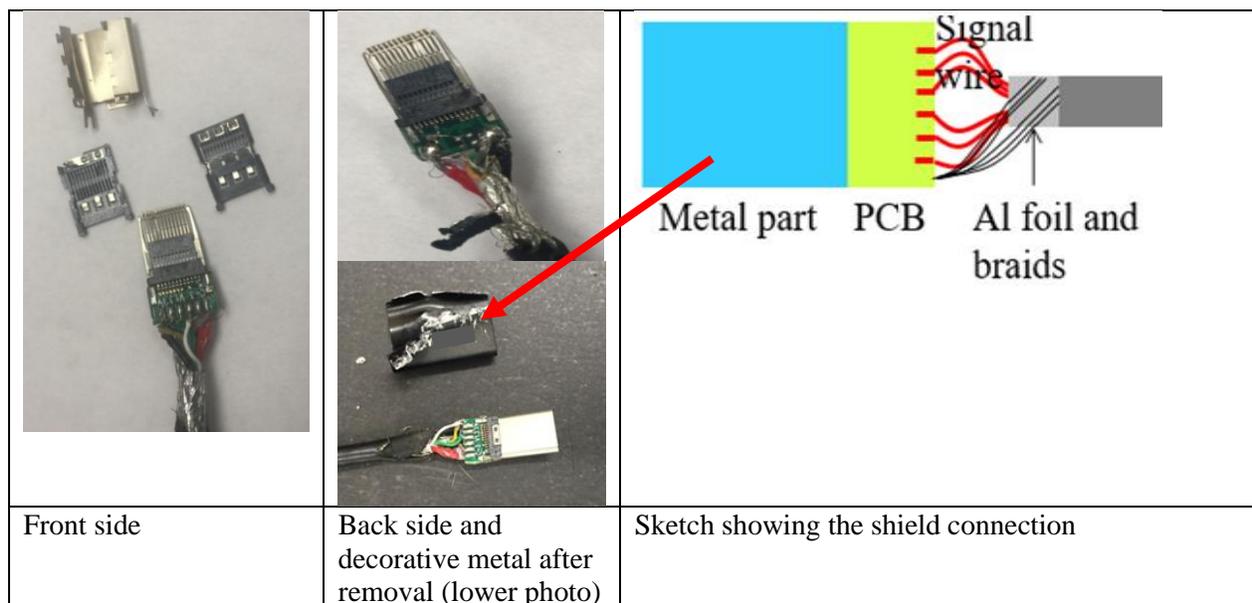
Photo and drawing explaining the shield structure of a badly shielded USB 3.1 cable.
